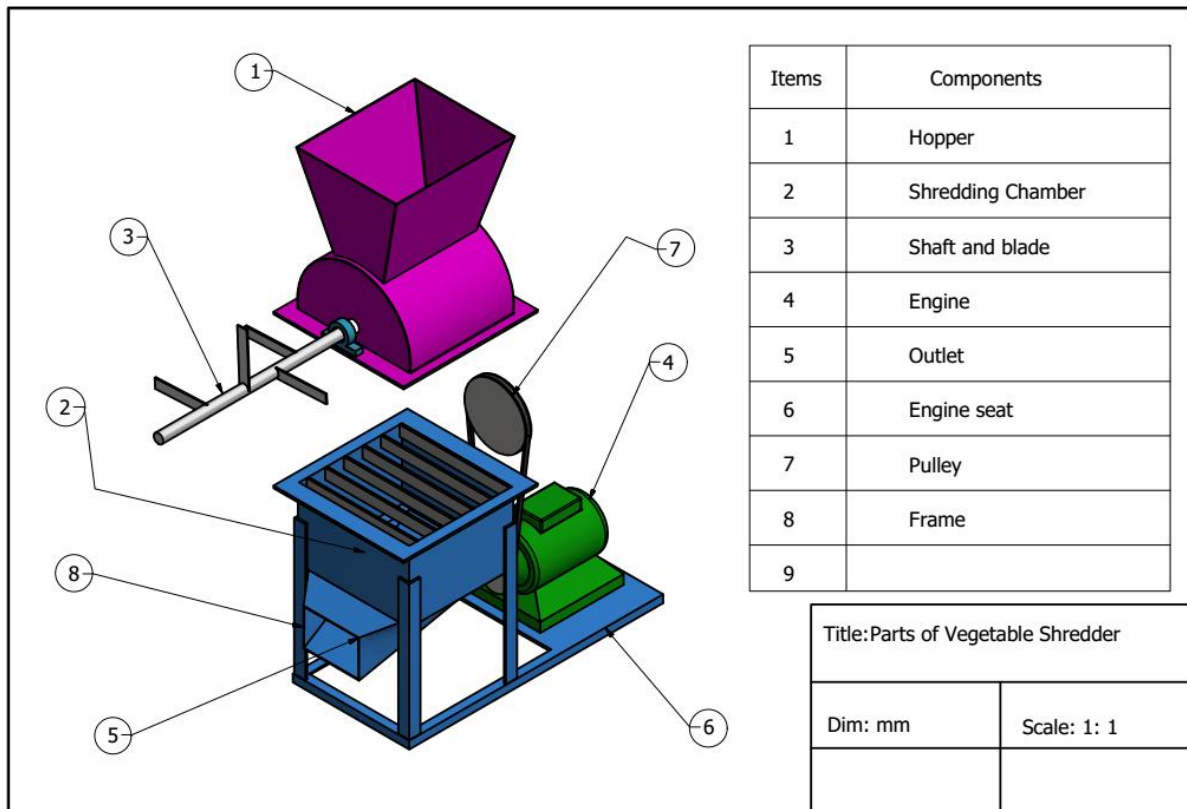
Orthographic Drawing of Vegetable Shredding Machine
